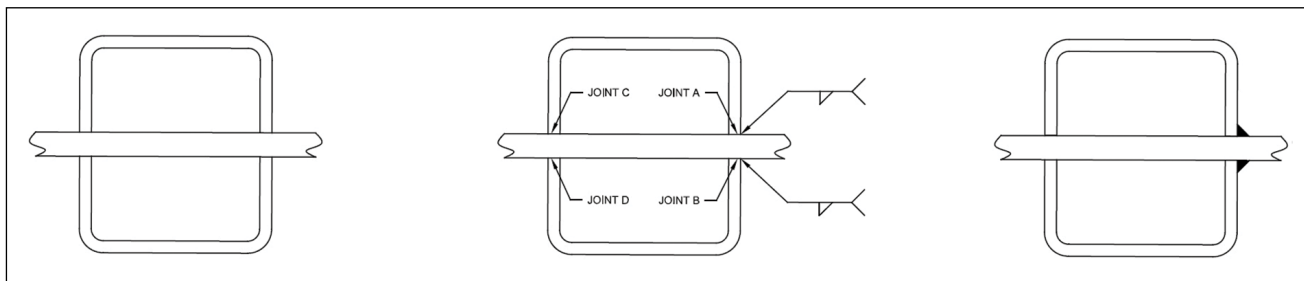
Slotted tube and plate with welding symbols on opposite sides of plate.
